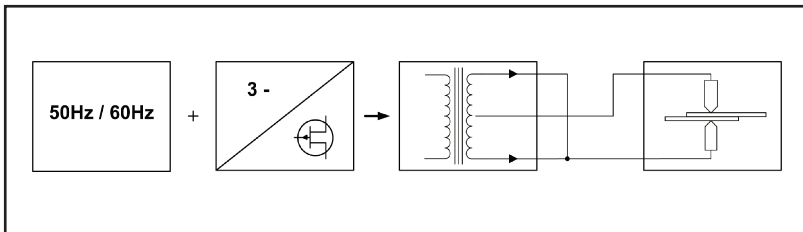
Schematic representation of a medium-frequency direct current (MFDC) resistance welding power supply. In this approach, AC power is rectified to DC, electronically switched to create MFAC, and then finally rectified following transformer voltage step-down. Figure taken from Ref. 10.
